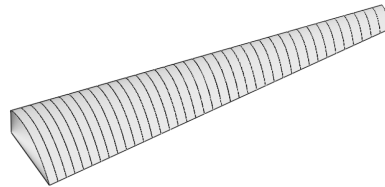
Orthographic 3D view of solid blade geometry (without filled NACA 4406 airfoils) linearized
